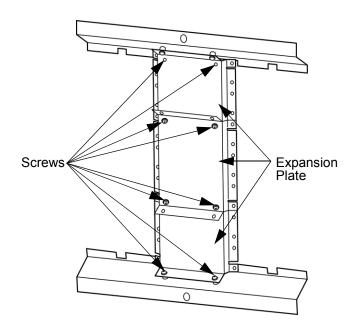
Assemble Stand Mount with Screws (CHS1U-US+CHS2U-USx3 Configuration)
